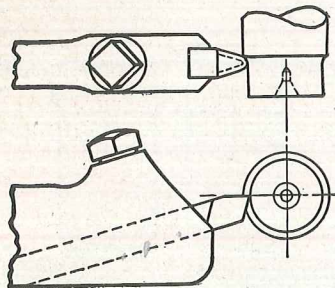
A.—A tool ground for machining bronze and brass. Note that the tool has no back rake or side rake and that the cutting edge of the tool is on the center line.
